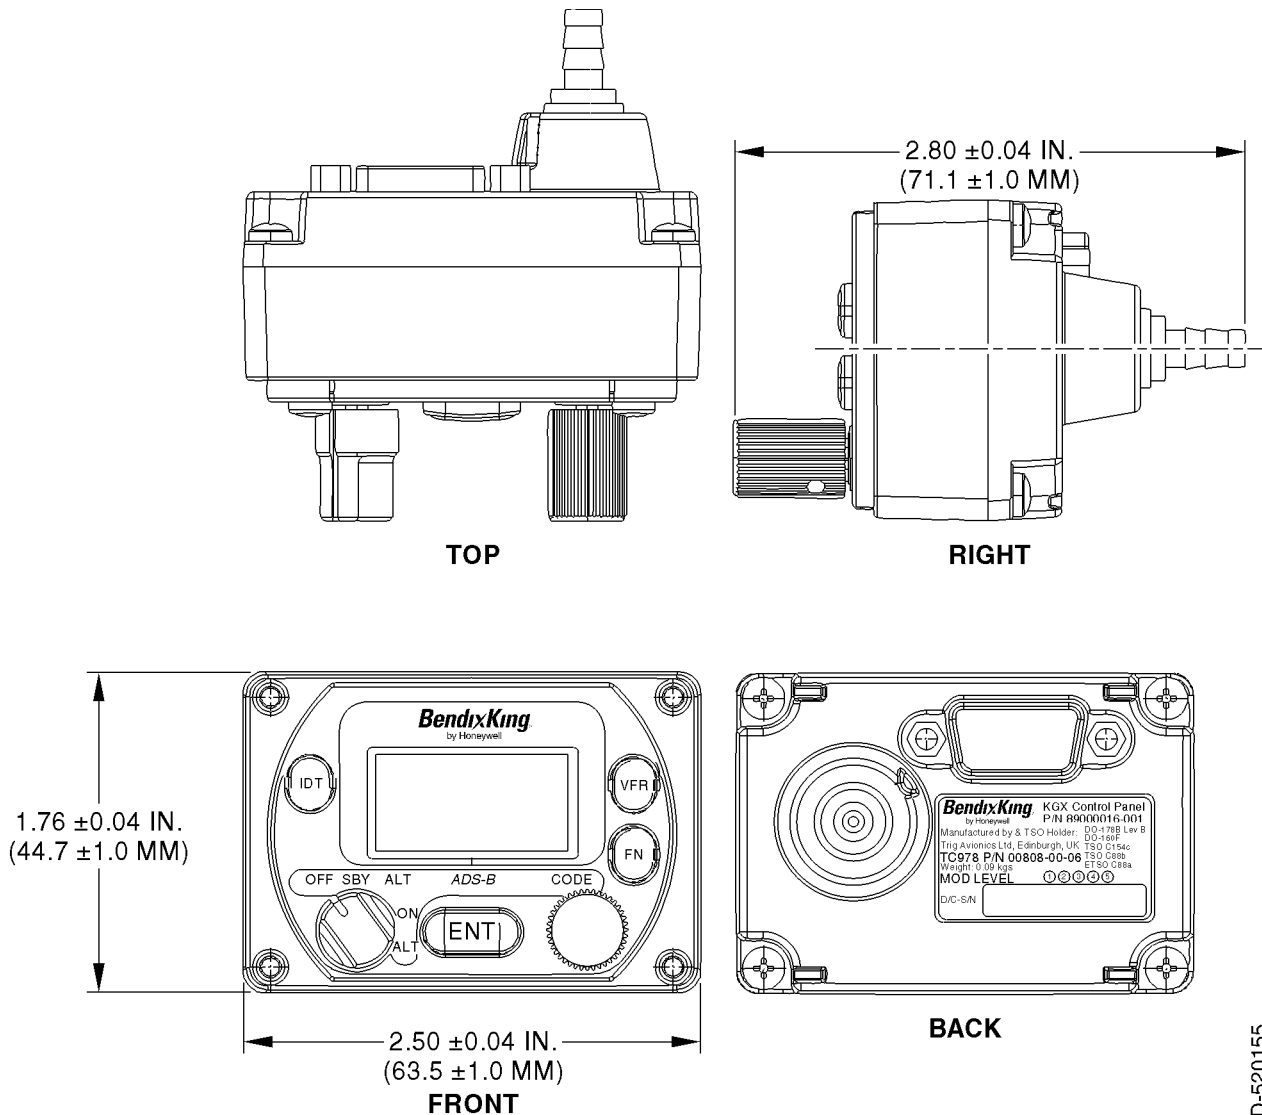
(Sheet 1 of 1) KGX Control Panel Dimensions
